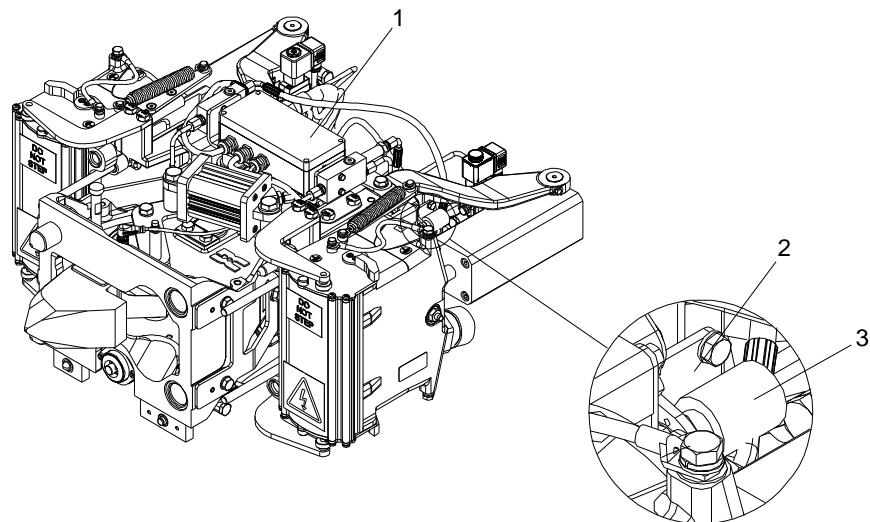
Replacement of Electrical Coupler Retracted Switch (S3.1 / S3.2)
